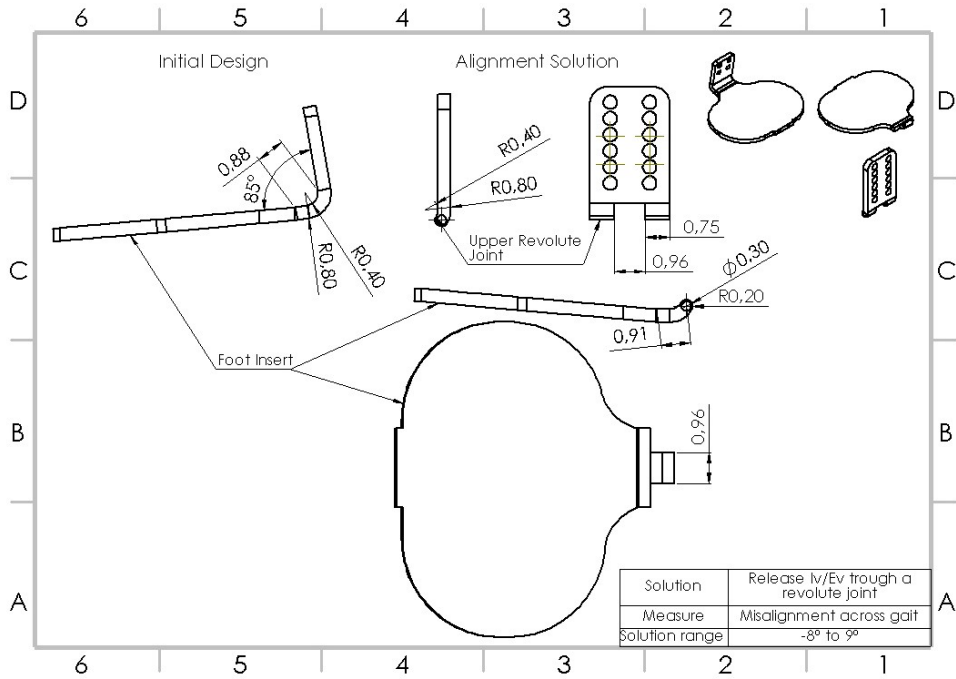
Technical drawing of the initial and final designs for the solution to release the inversion/eversion DOF.
